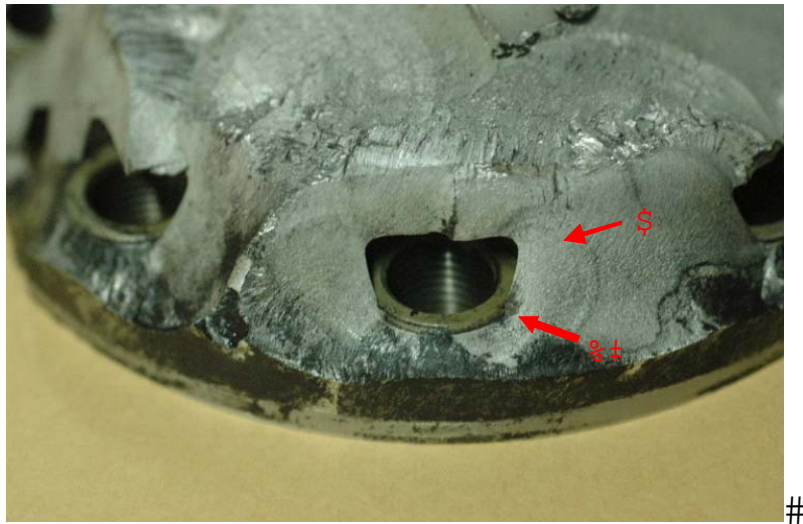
Fatigue cracks: darker surface shows earlier crack development while the lighter surface shows cracks developed somewhat later
